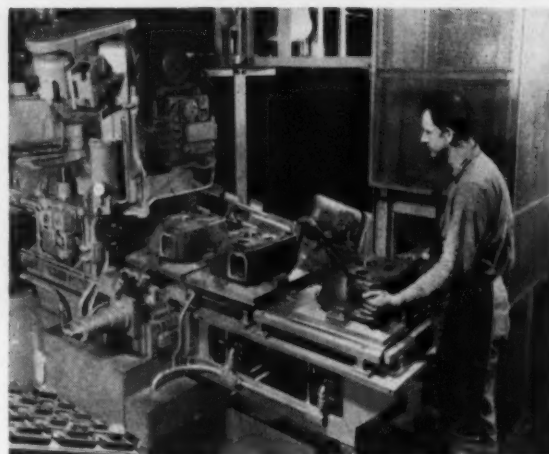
The 15-station W. F. & John Barnes transfer machine on bell housings. A total of 89 drills, counterbores, spot facers, taps, etc., are teamed for pushbutton operation.
